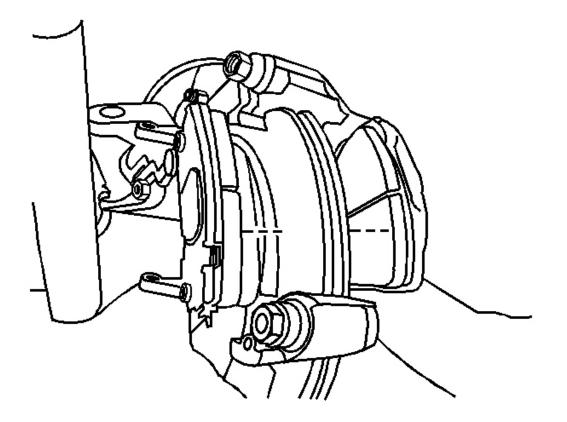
View Of Caliper Bracket Courtesy of GENERAL MOTORS CORP.
